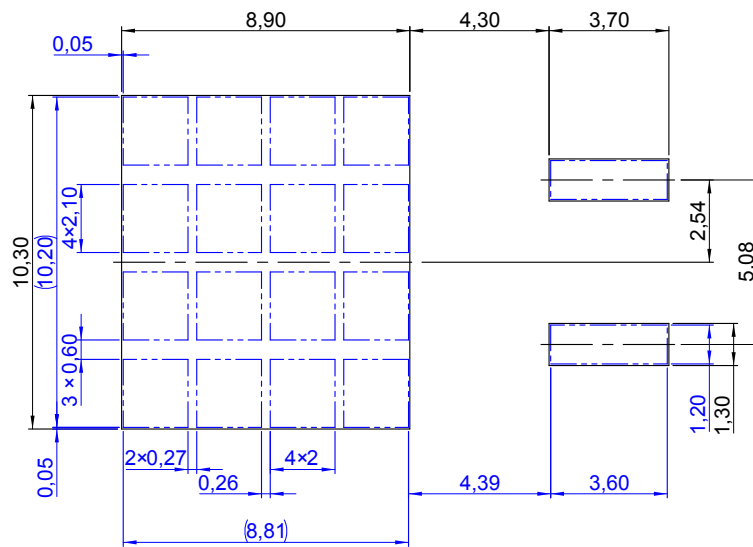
D<sup>2</sup>PAK footprint and stencil dimensions' definitions (dimensions in mm)
